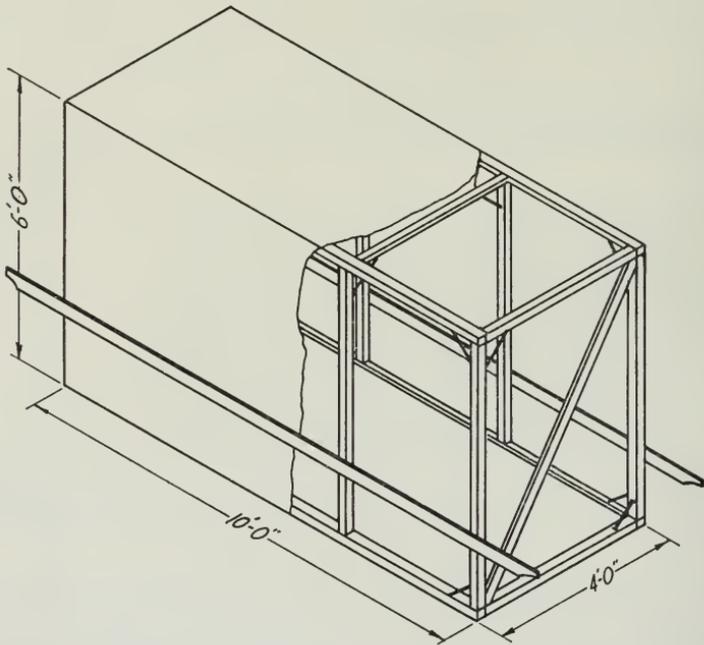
Lift-over sulfuring box or hood. The frame is constructed of 1 × 2 inch lumber braced at the corners with steel angles or plywood gussets, and is covered with sturdy building paper. This hood may also be used for small-scale fumigation of dried fruit on the farm.
